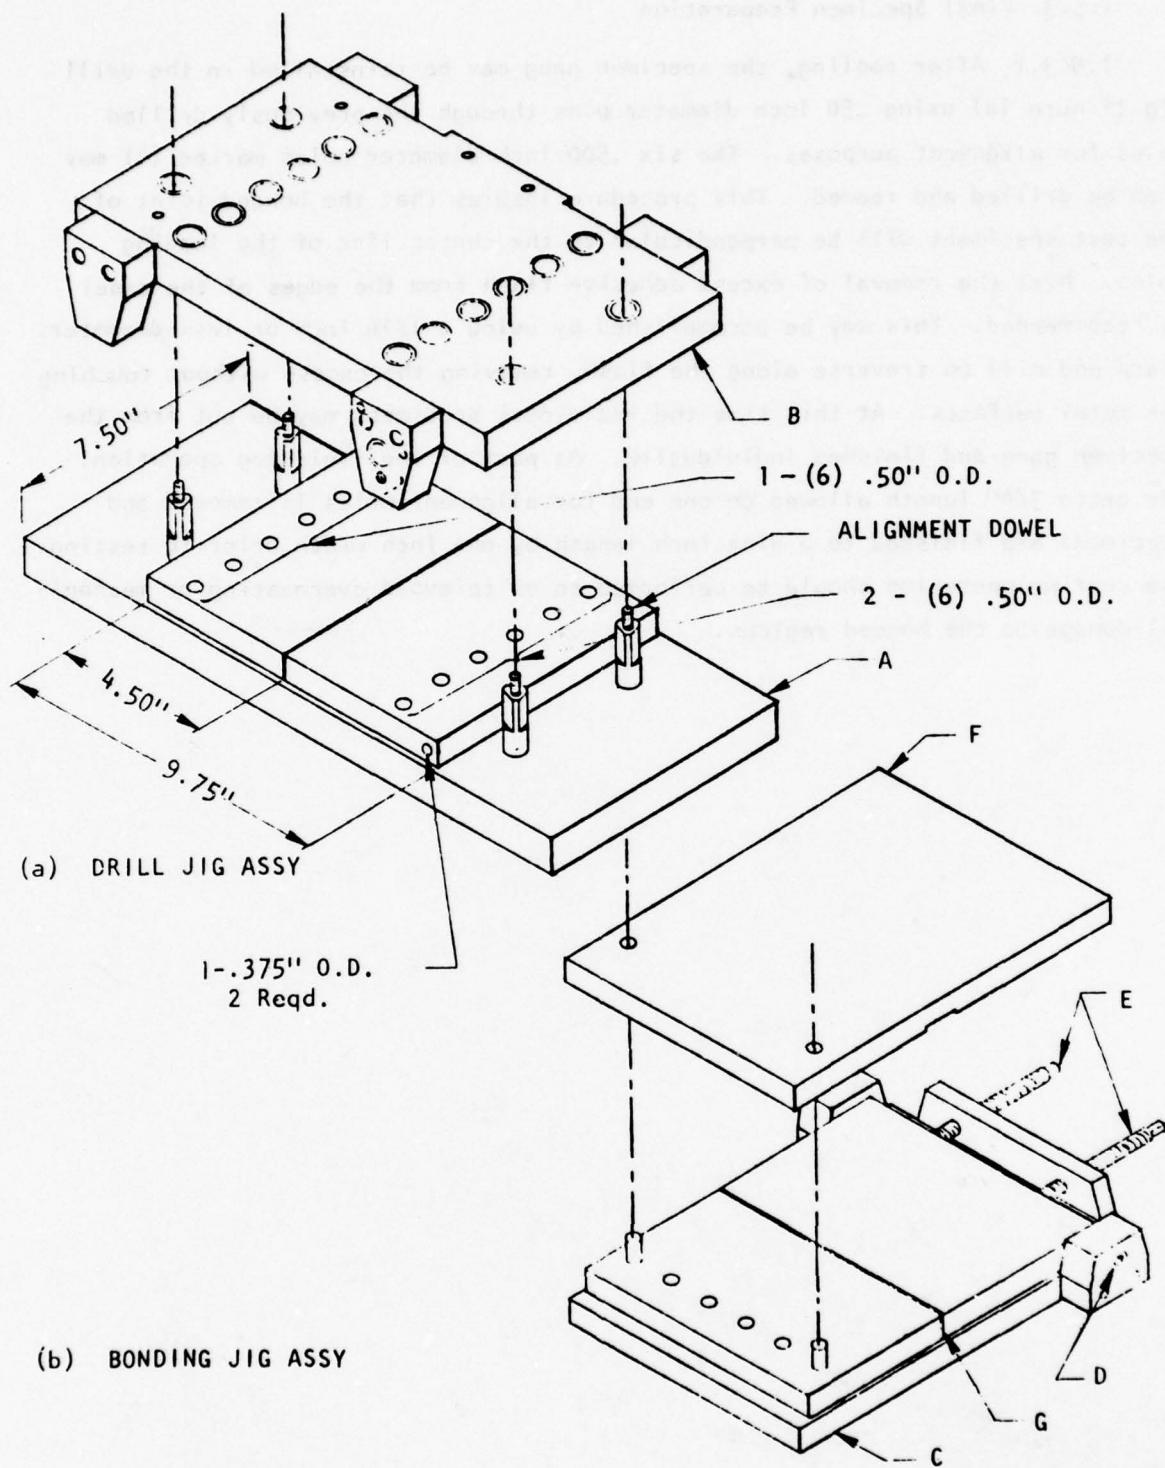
DRILL AND BONDING JIG ASSEMBLY
